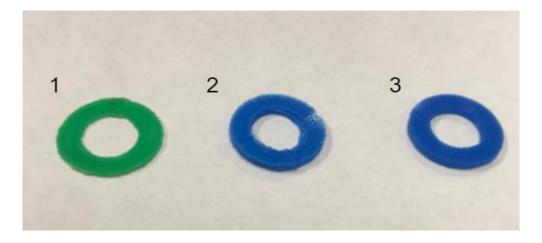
Three PLA prints from the custom 3D printer. Print 1 was the first successful cohesive print. Print 2 was performed after various calibration improvements, and print 3 was performed with the current printer setup.
